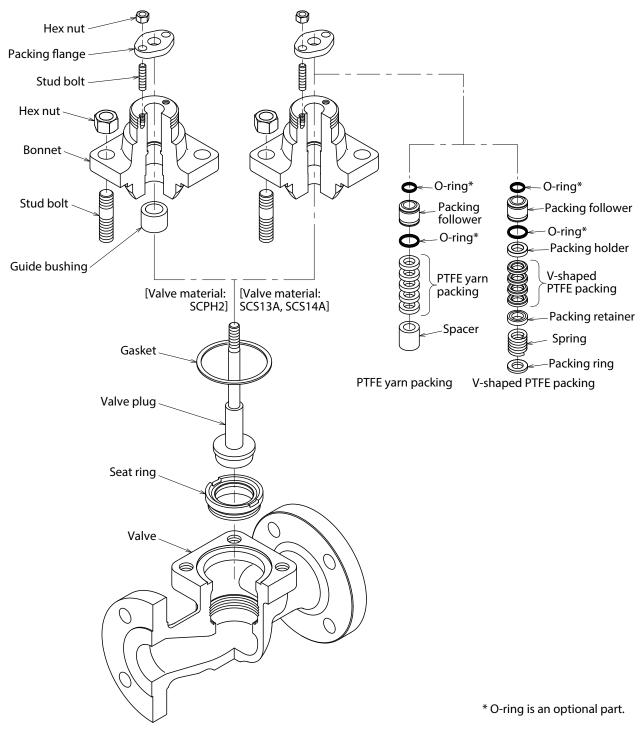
Valve body structure (connection diameter: 11/2 or 2 inches)
